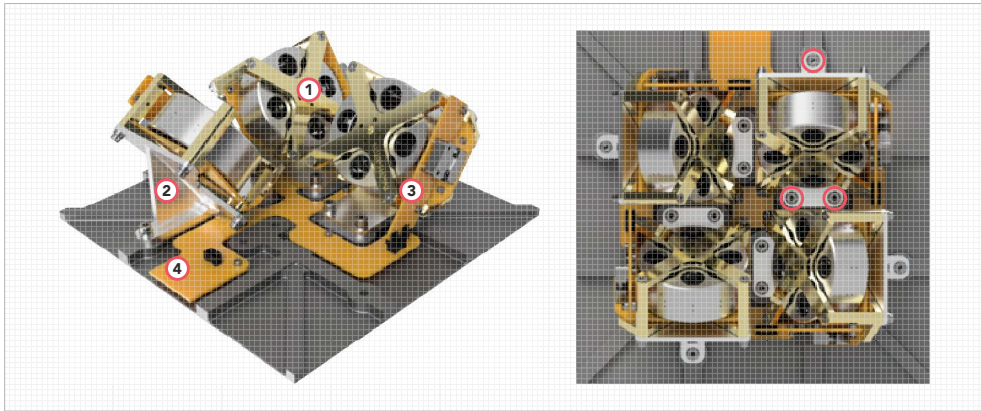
The left image shows three reaction wheel modules with the wheel itself (1), the mounting structure (2) and the PCB (3) that bridges between the wheel's connector and the on the interface PCB (4) mounted on an exemplary structure. Here, one wheel was removed to uncover the mounting structure and the interface PCB. The right image shows four reaction wheels mounted onto the satellite panel with the three screws that allow to remove the module circled in red for one of the modules.
